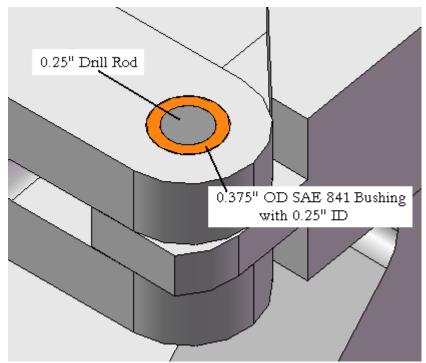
Showing implementation of drill rod and SAE 841 oil impregnated bushing to significantly reduce joint friction coefficients.
